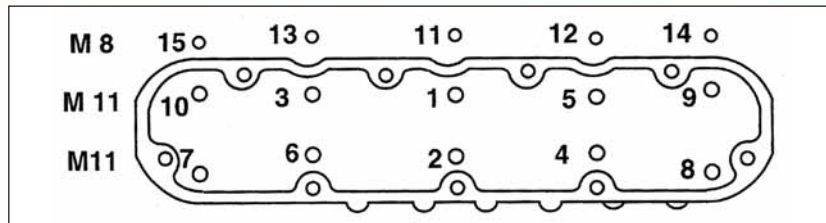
Torque the cylinder head bolts in the following sequence for 1999-'06 6.0L GM engines.
